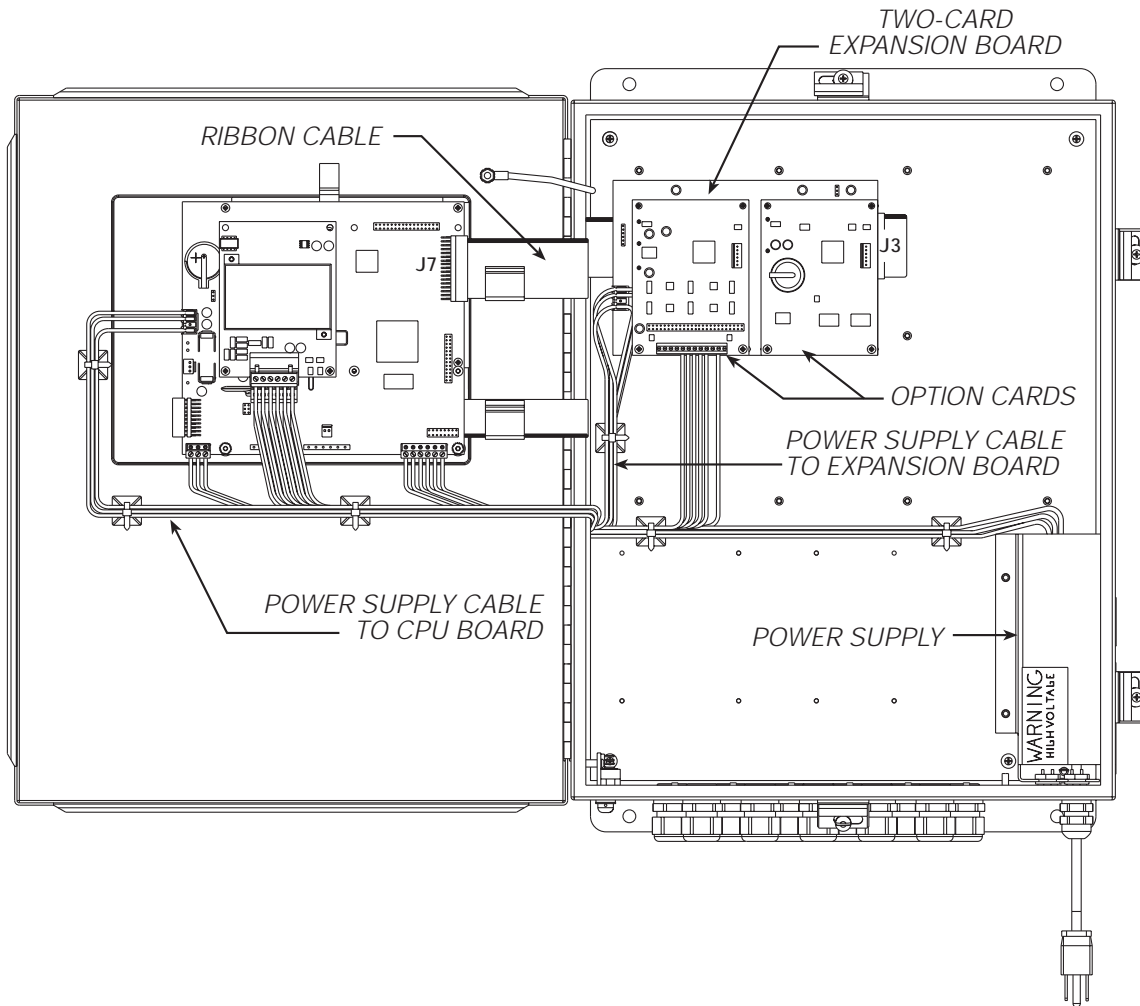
Two-Card Expansion Board Installed in Wall Mount Enclosure
